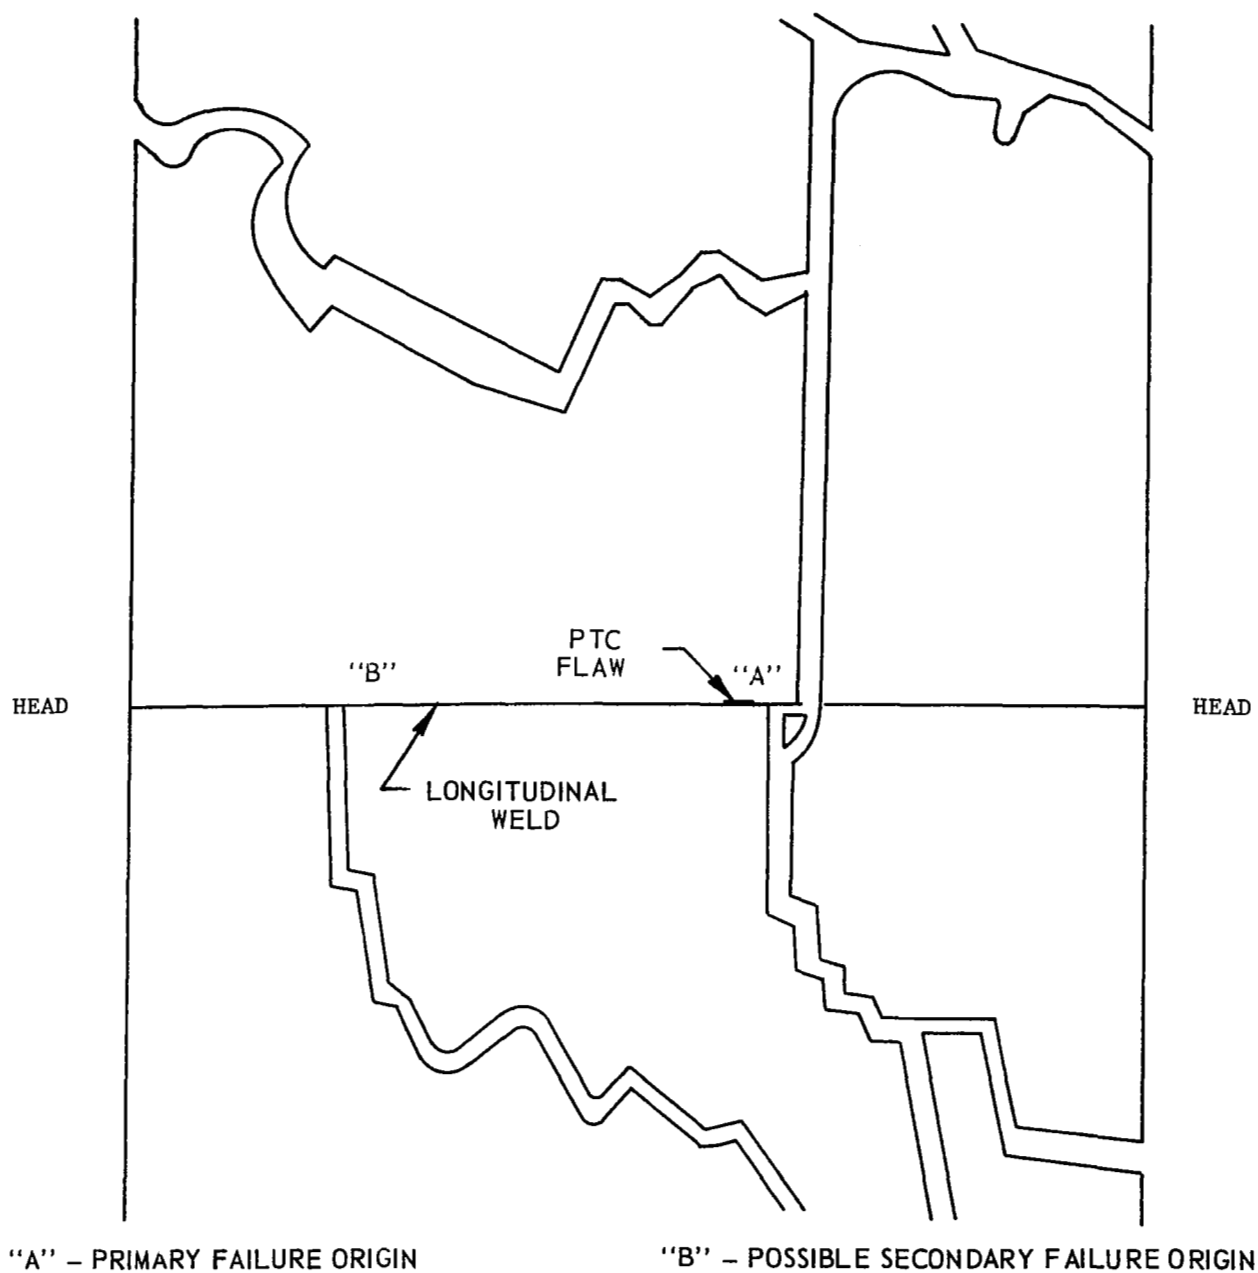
Fracture Surfaces in the Cylinder Section Near the Longitudinal Weld. 2014-T6 Vessel Tested at -320°F .
